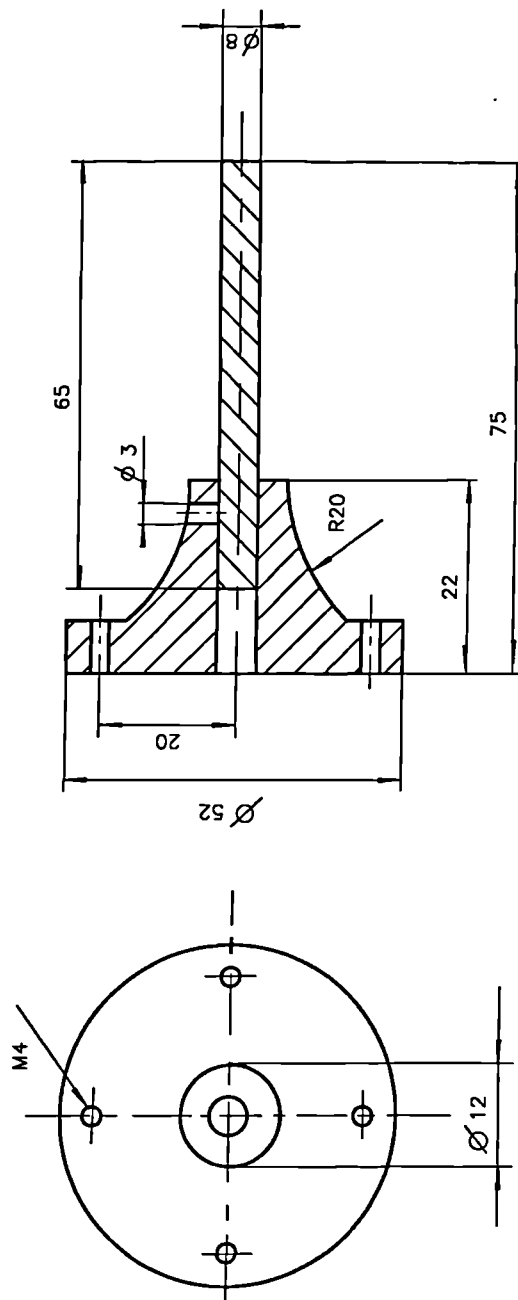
Connecting piece between vibrator and box. All dimensions in mm.
